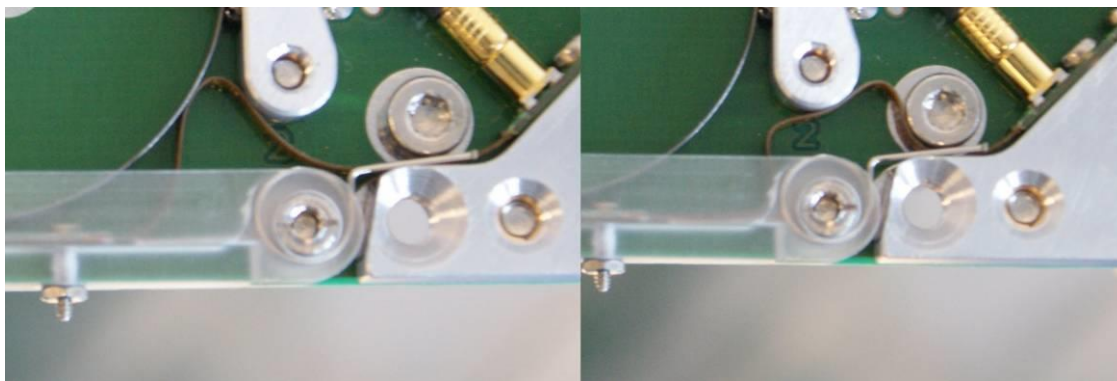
Left: improper routing of flex-rigid PCB; right: proper routing of flex-rigid PCB
